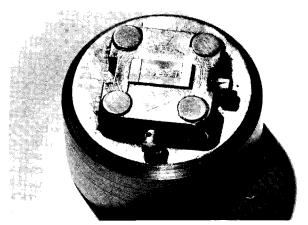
Steel Mold Used for Preparing Transverse Samples.
